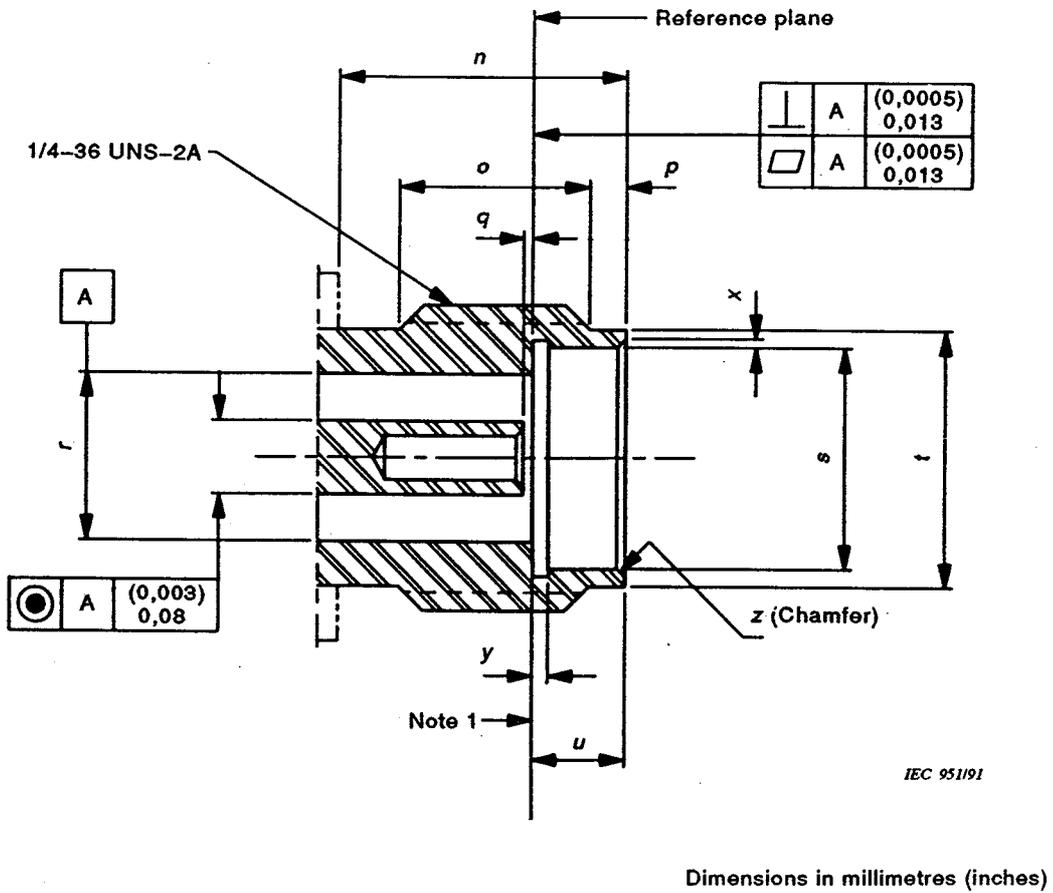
Socket connector (for dimensions, see table 1 which follows)
